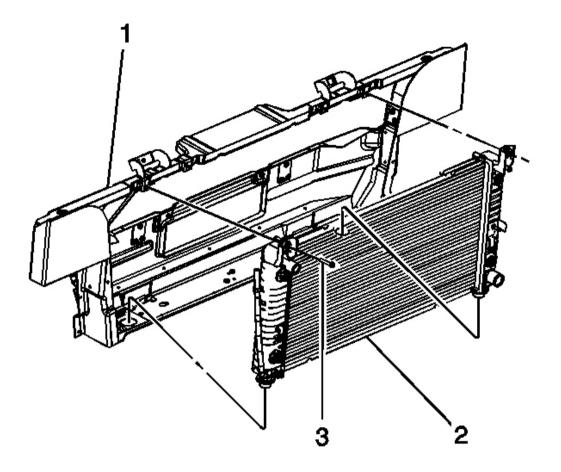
Identifying Radiator Courtesy of GENERAL MOTORS CORP.
